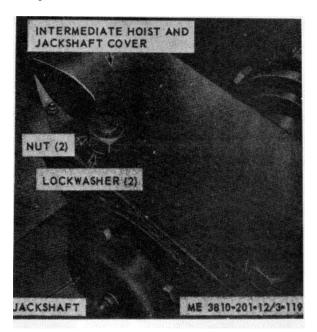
Intermediate hoist and jackshaft cover, removal and installation.
